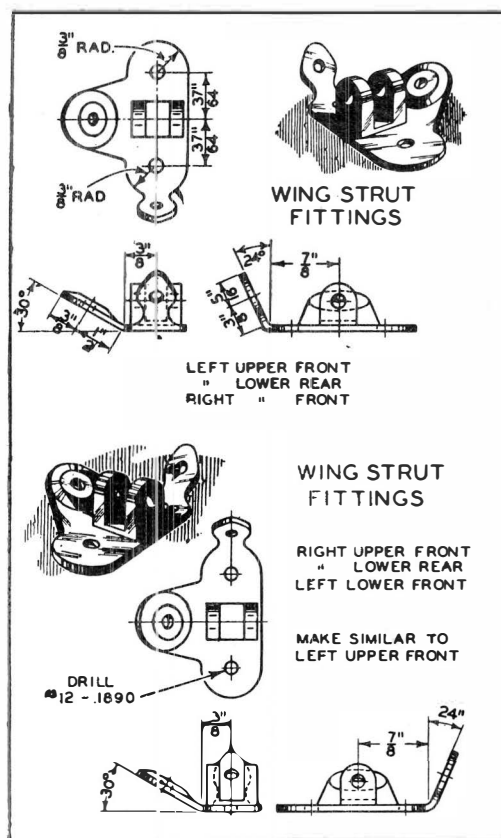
The method used in building up a wing strut fitting is shown by the above dimensioned cut. The tabs are welded after bending is done.
